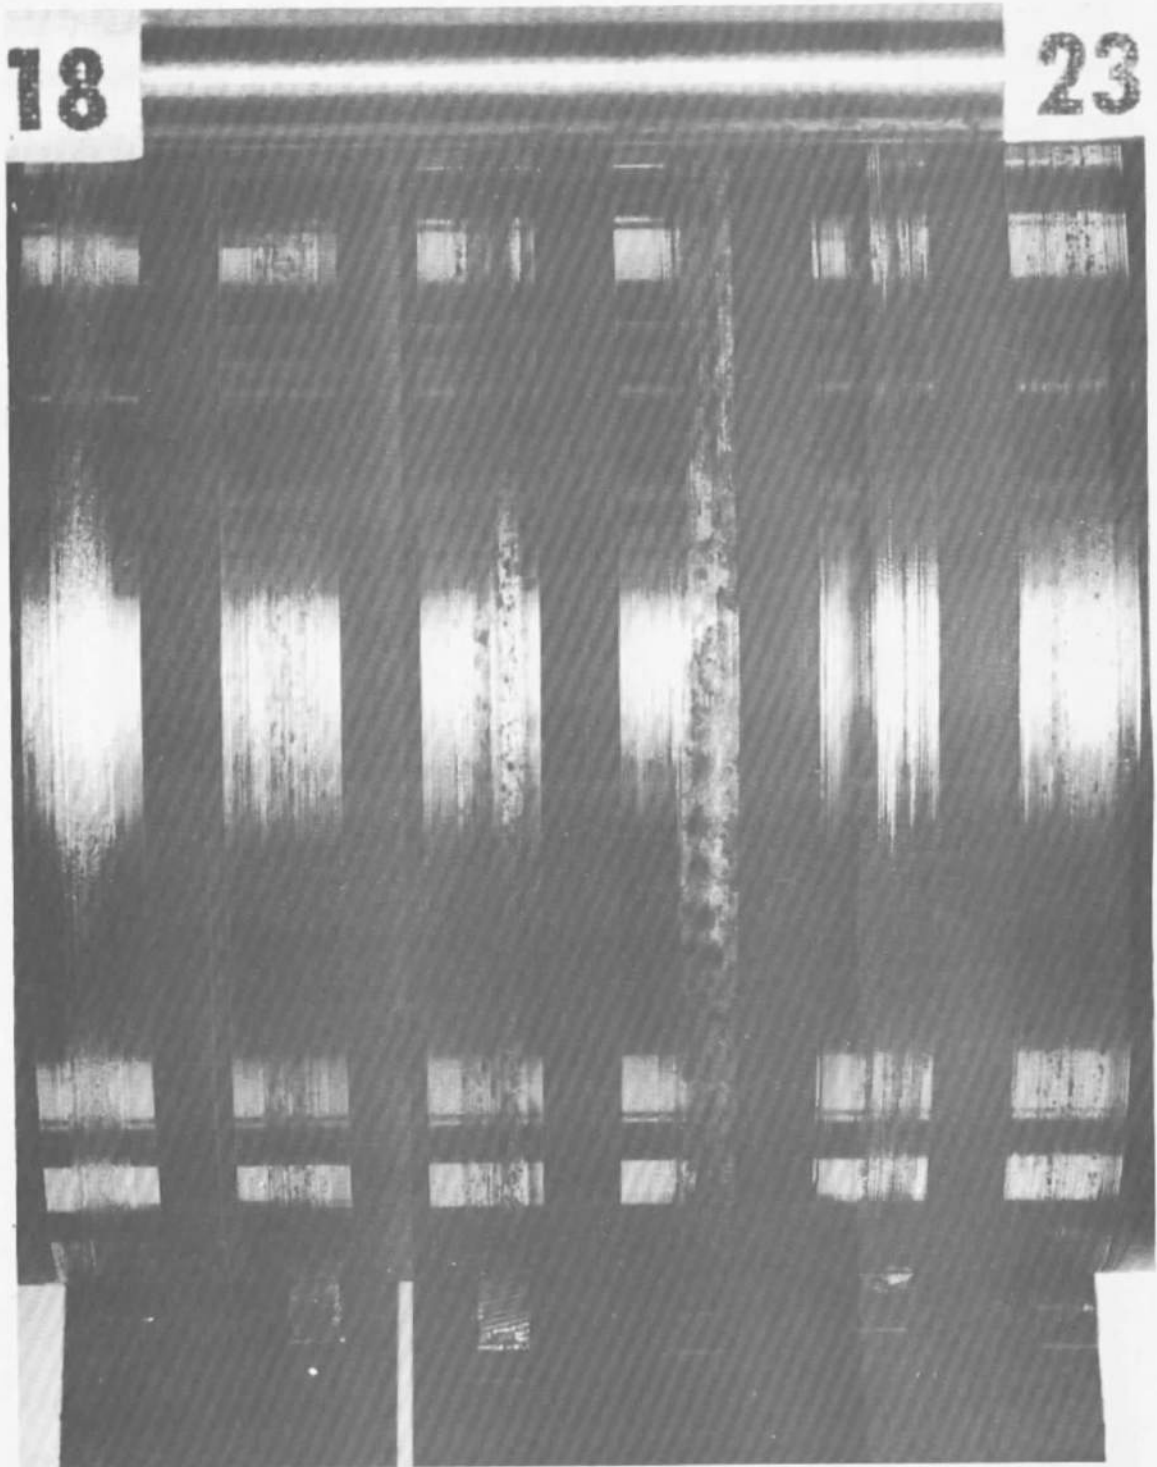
Detail at Positions 18 Through 23 of Assembly 2 After Testing
